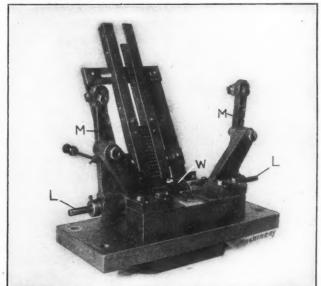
Rear View of Die showing Clip for holding Blanks in Chute
